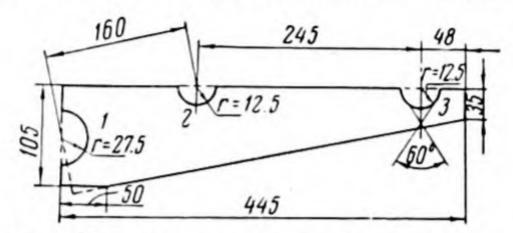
Template for checking MΓΓ-299 circuit breaker mechanism
